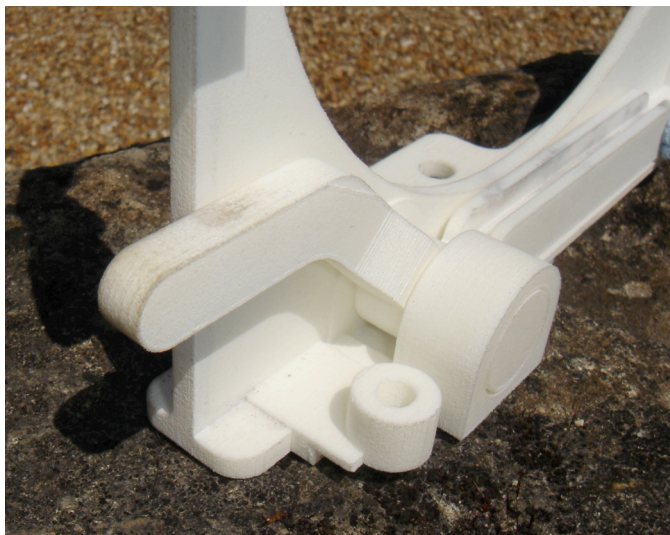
SLS pivot arm and solenoid bearing surface after tests.
